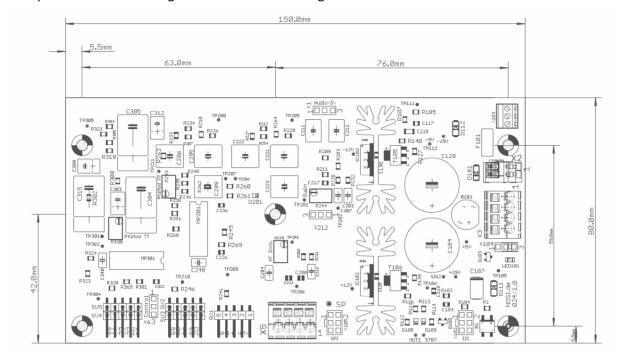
Layout of the PCB, top view and populated as AC-AAD
